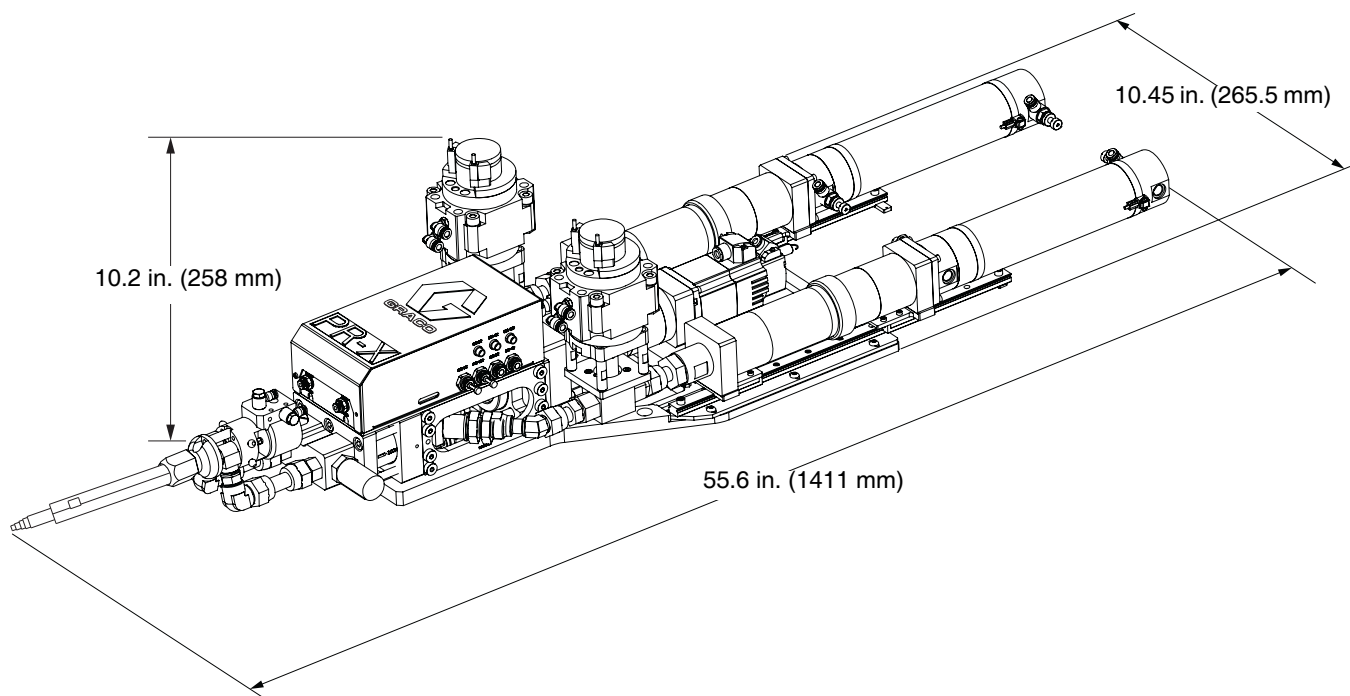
PR-X Machine Dimensions, Cartridge Feed
